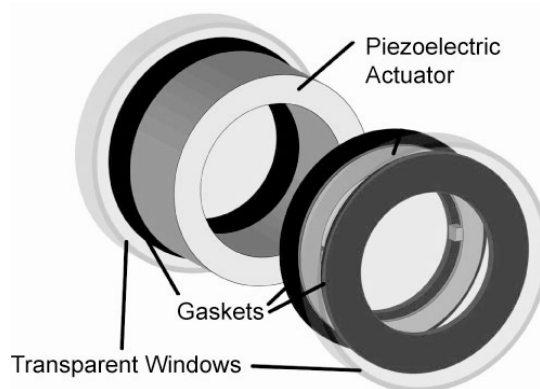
Schematic of TAG lens assembly. Geometry can be modified to include arbitrary shapes and sizes.
